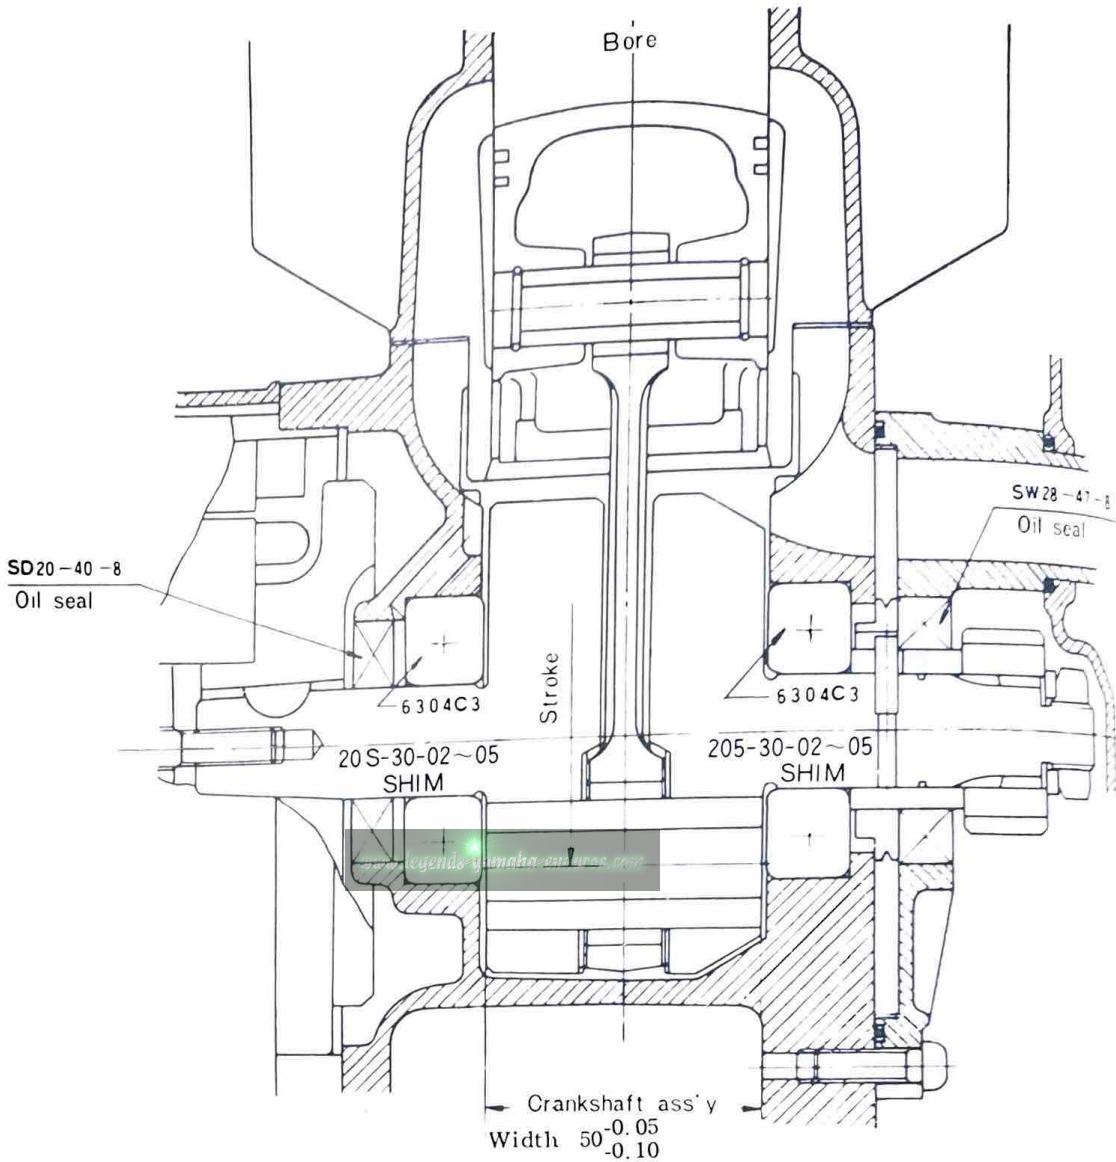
Crankshaft Ass'y Dimensions
